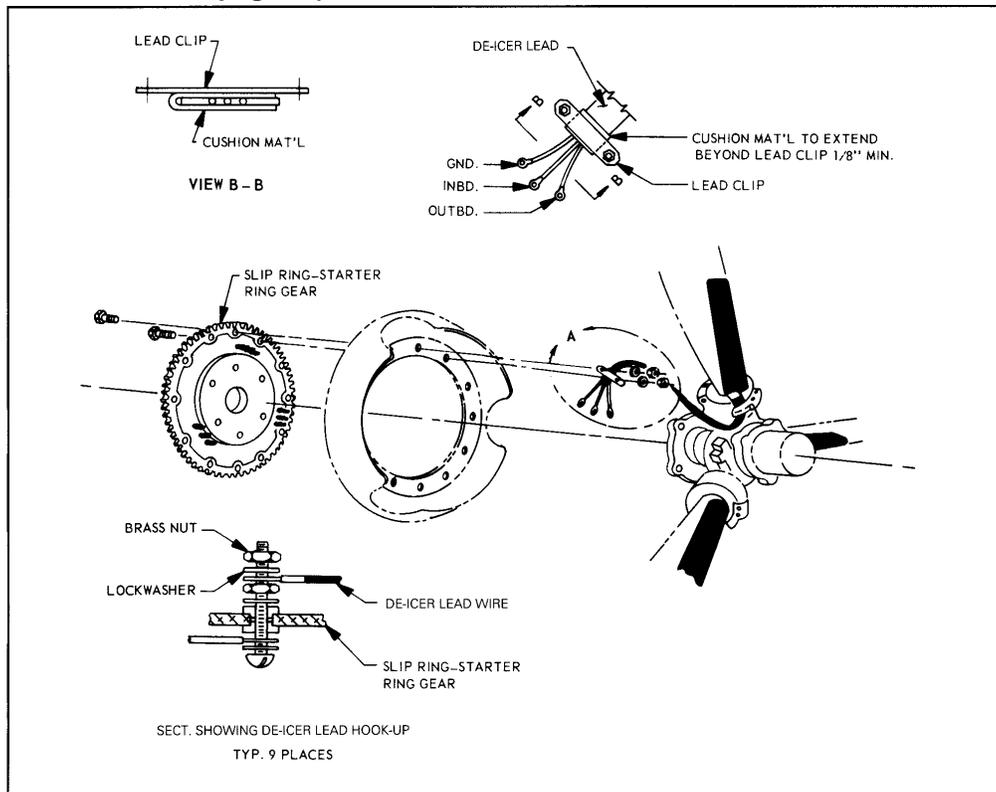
Typical Slip Ring/Starter Ring Gear Assembly Installation
